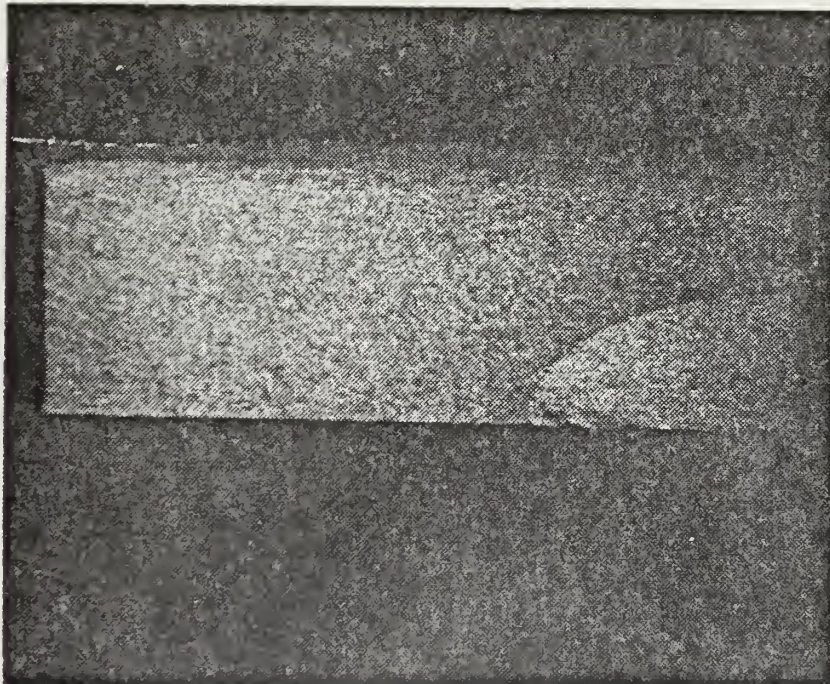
Macro-fractograph of specimen RI-I-2, which was under lower stress than that of Fig. 76. It was fractured after 134,100 cycles at 65 ksi. It is evident that the fatigue zone of this specimen is larger than that of specimen of Fig. 76. X10.
